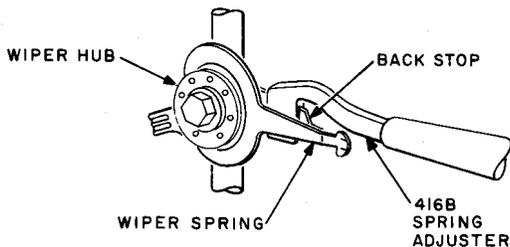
Method of Adjusting Commutator Wiper Back Stop
